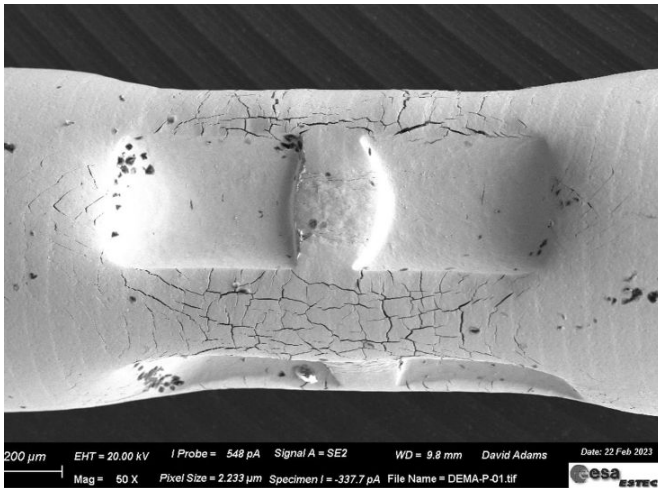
C/N 340100508B Cracks in crimping area (Credits: ESA)
